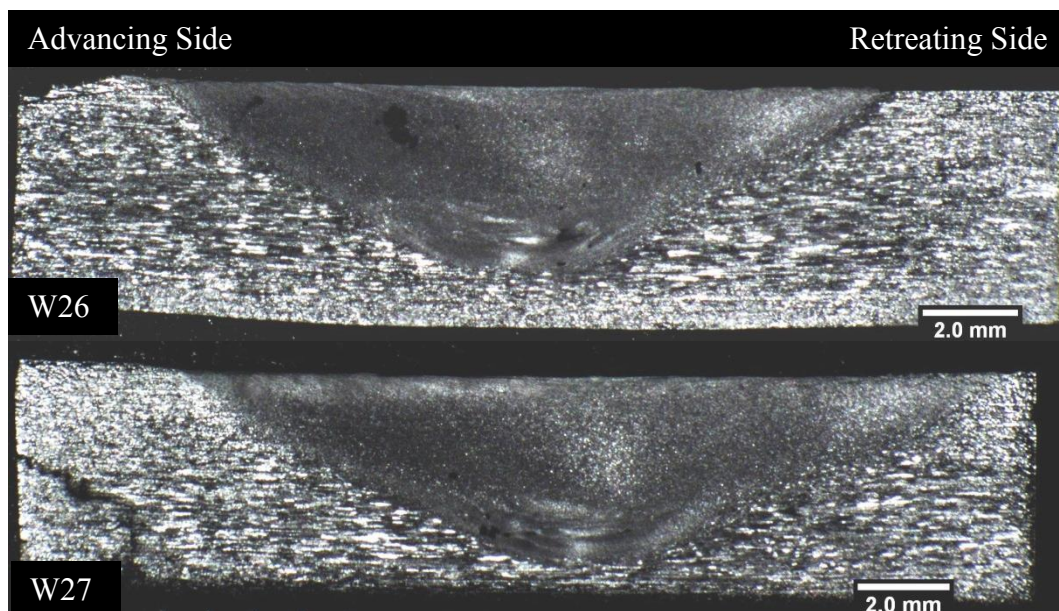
Optical macrographs of the cross sections of BOP welds W26 and W27 (etched with 10%HCl in methanol).
